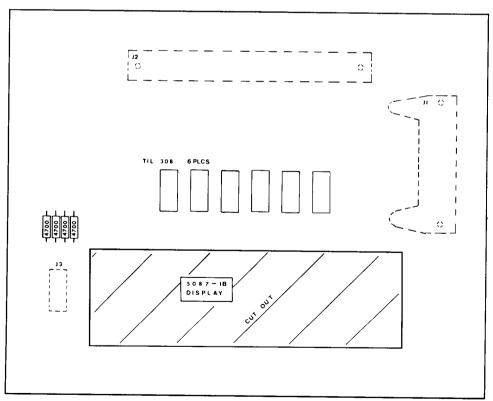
DISPLAY BOARD COMPONENT LAYOUT.
